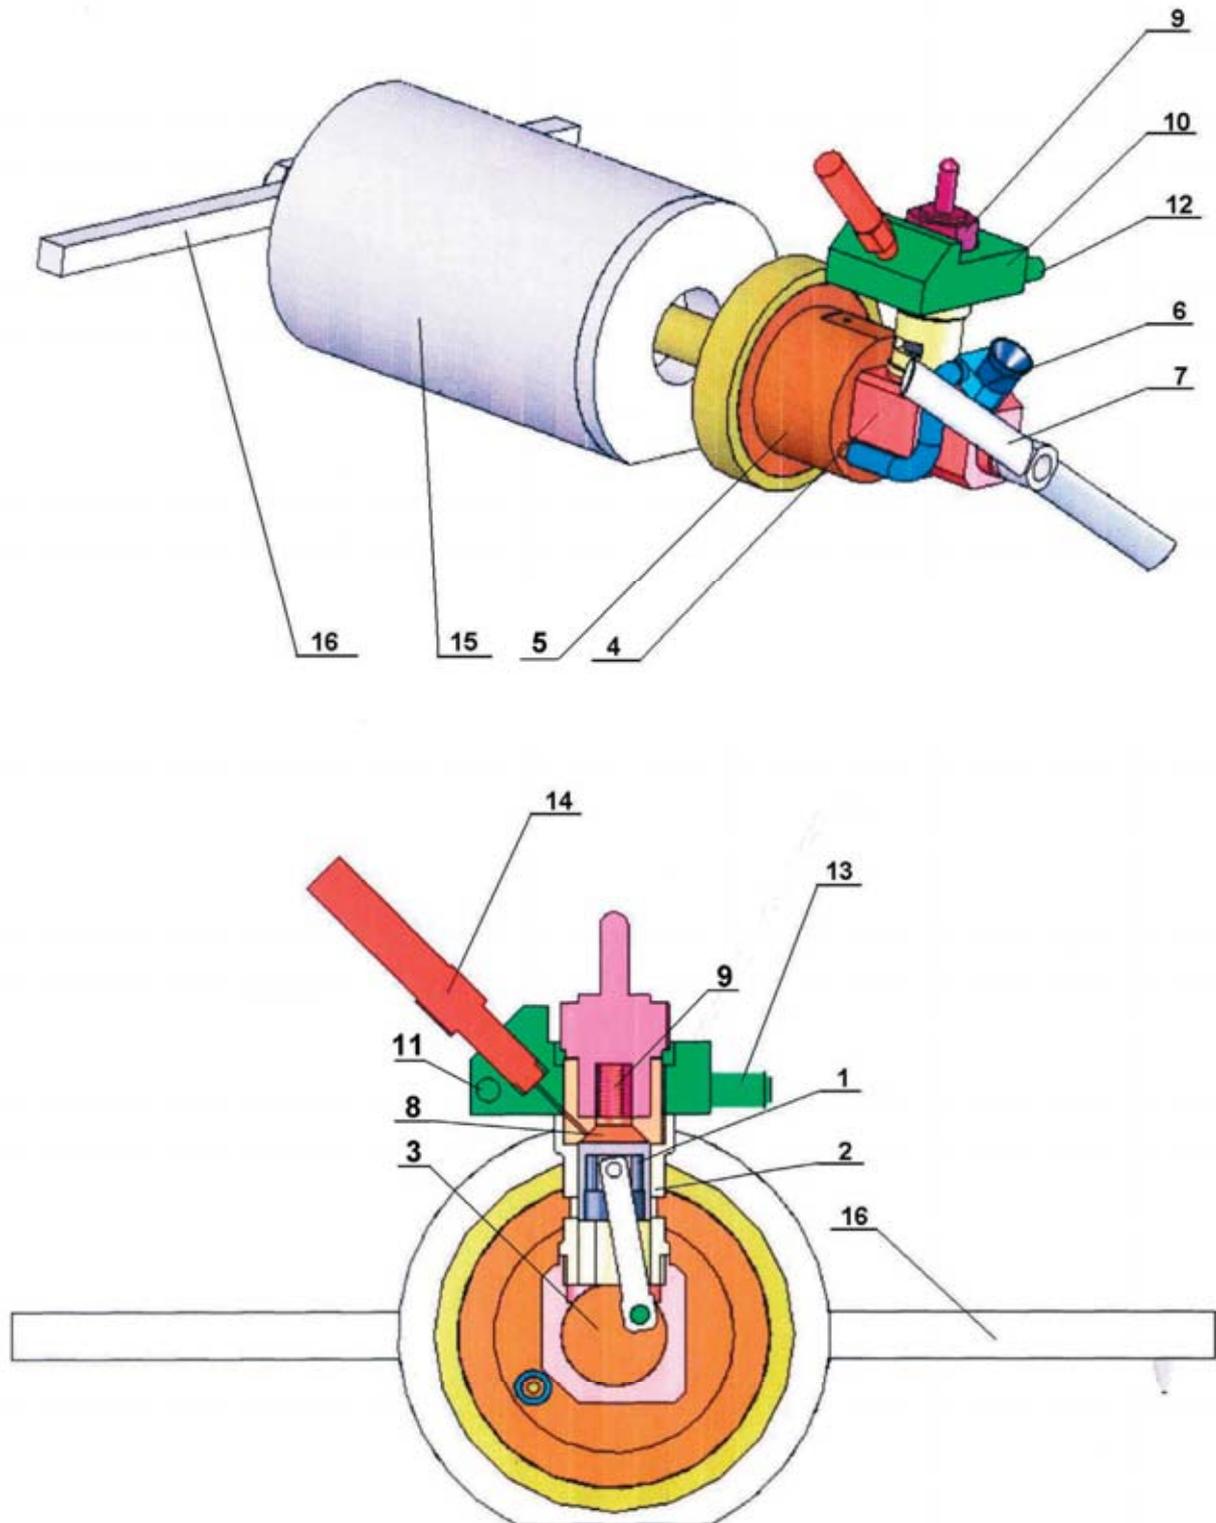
The view of the miniature propeller shaft engine, together with the miniature brake
